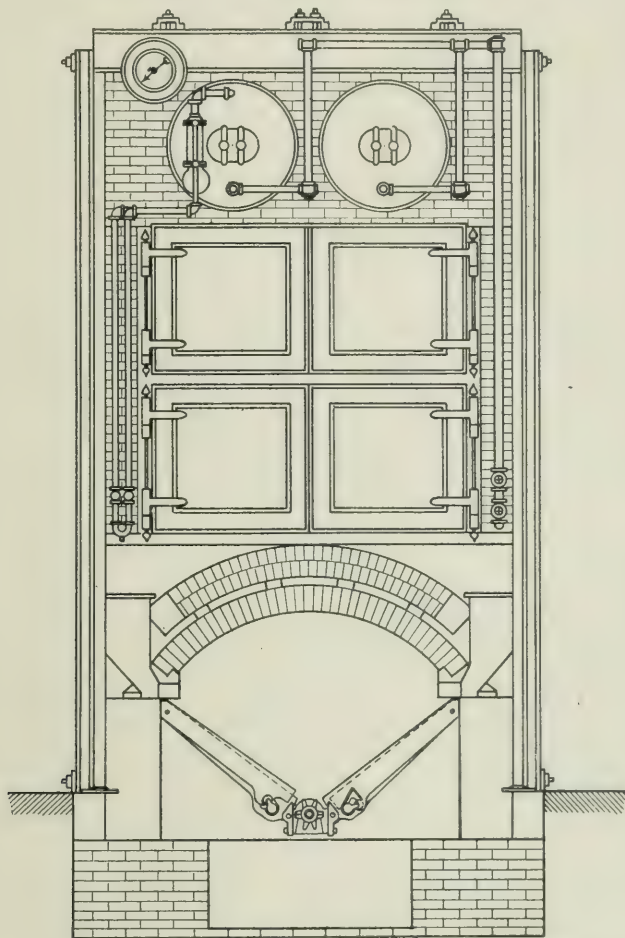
ELEVATION OF BOILER AND FURNACE SHOWN IN FIG. 8.
